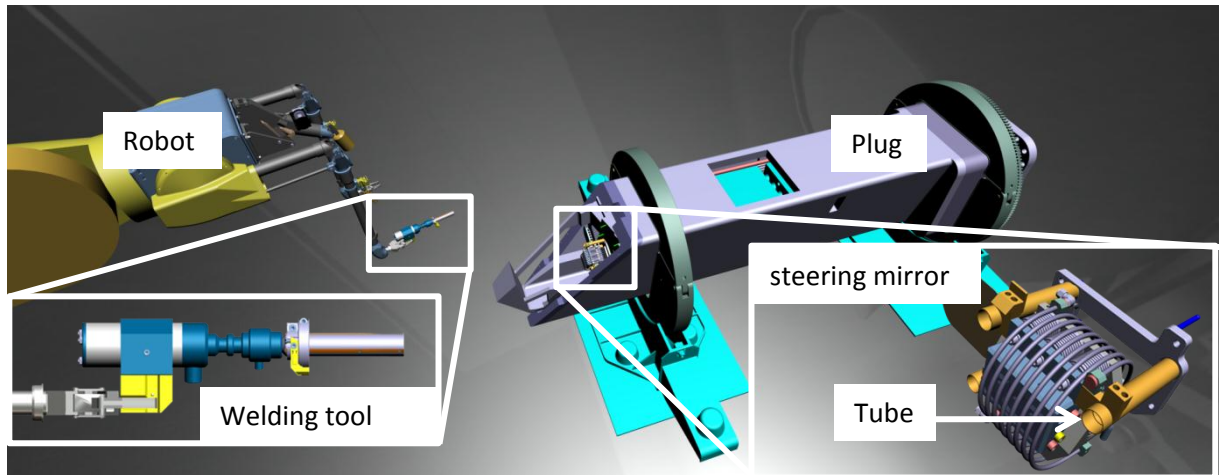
overview of the hotcell with robot, plug, steering mirror, tube and welding tool.
